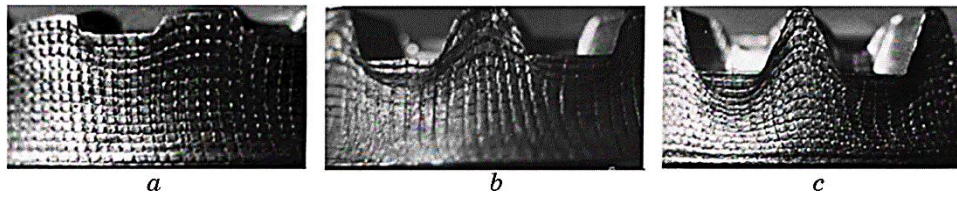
View of the rings after direct extrusion of the end profile by the extrusion method and cutting off a part of the external ring.
